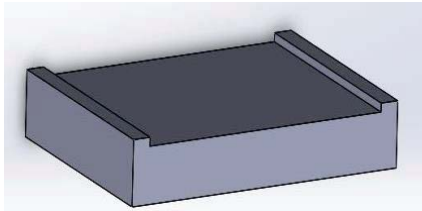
The wood specimen distances are 80x60x20 mm, the total cutting depth is 5 mm
